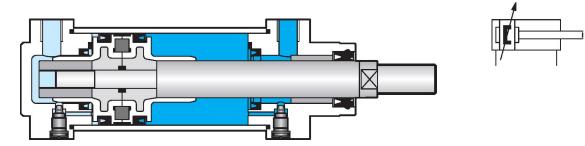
Double-acting cylinder with end-position cushioning – sectional view and symbol
